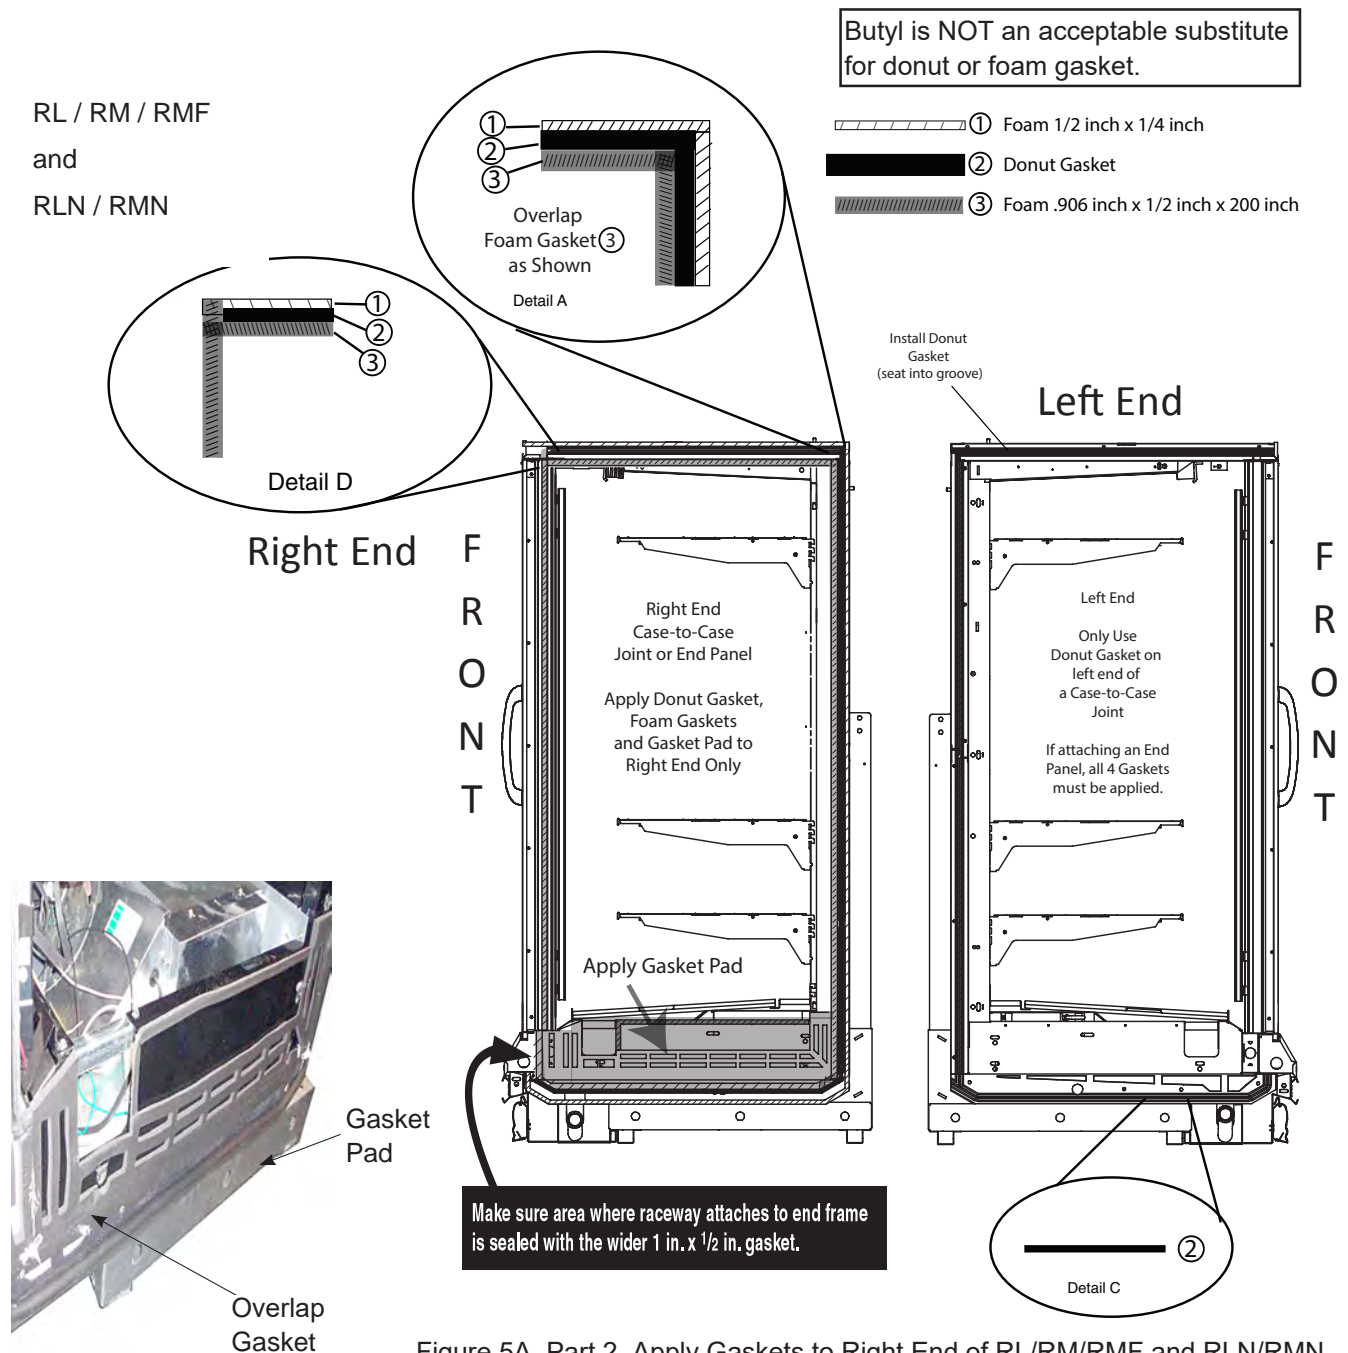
A, Part 2. Apply Gaskets to Right End of RL/RM/RMF and RLN/RMN
